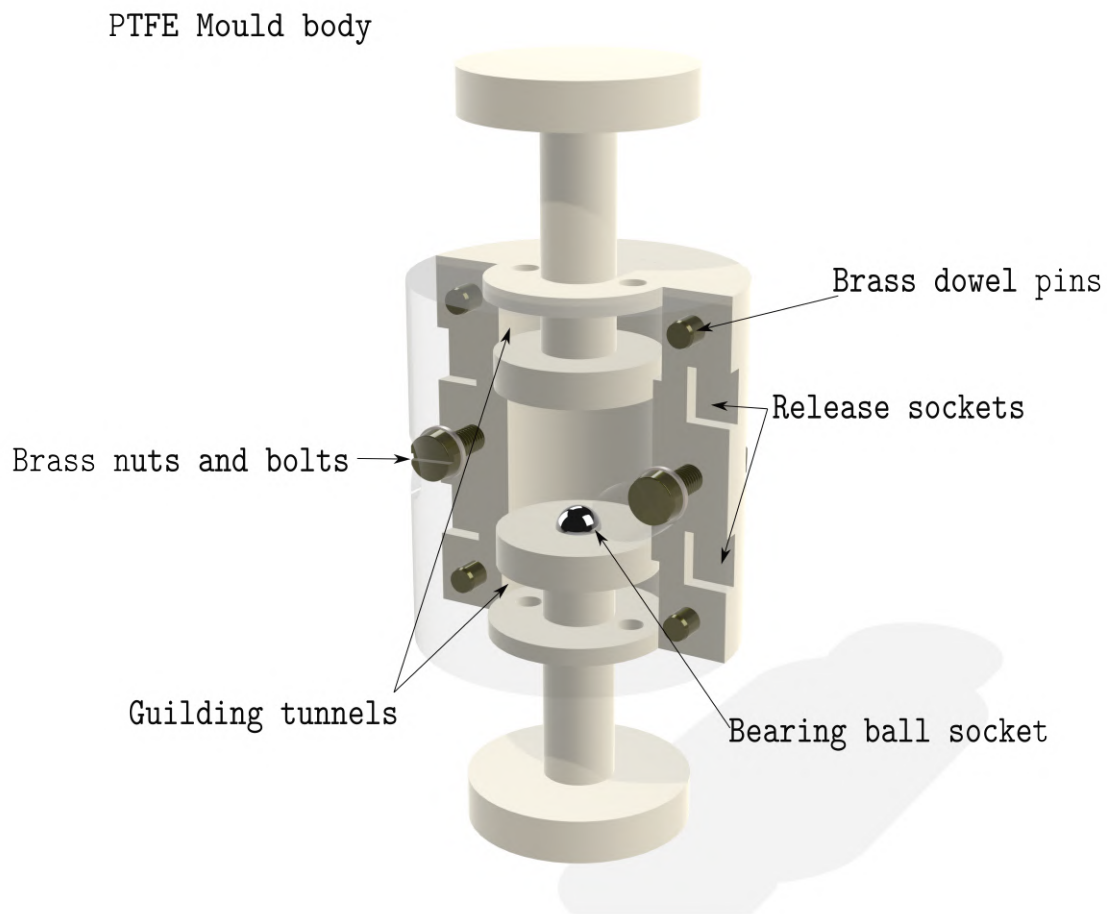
Schematic of the split mould which was used to shape cylindrical charges with a 5 mm stainless-steel ball bearing insert.
